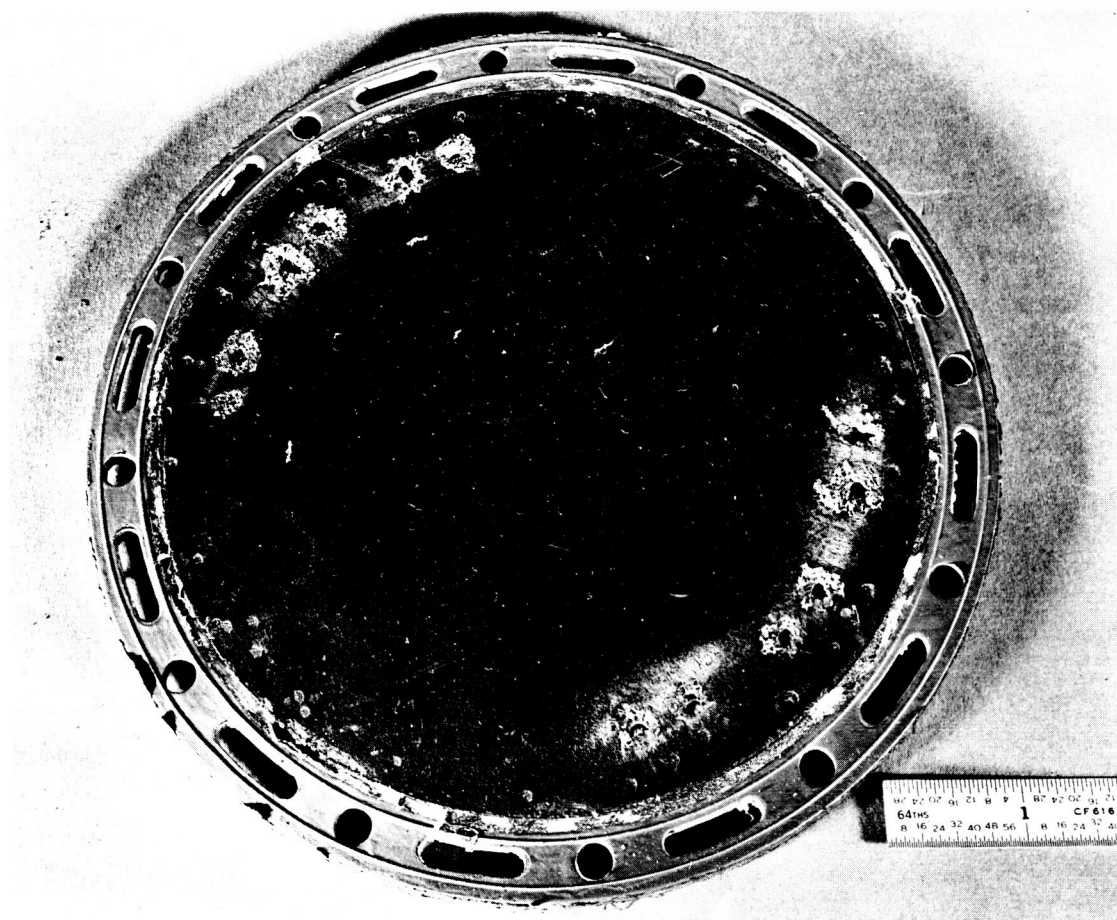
ELECTRODE SEPARATOR ASSEMBLY AFTER EXPLOSION
